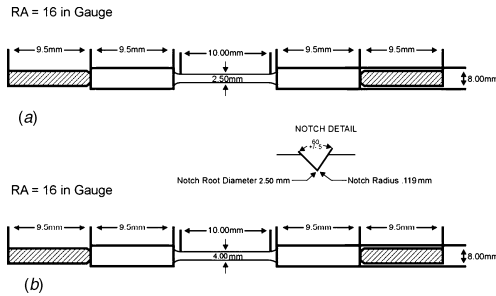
(a) Sample drawing for smooth fatigue samples. (b) Sample drawing for notched fatigue samples.
